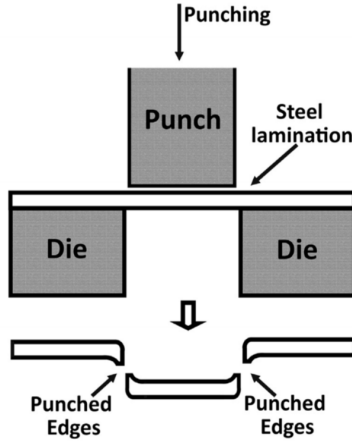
Punching of electric steel sheets showing how a burr is formed [21]
